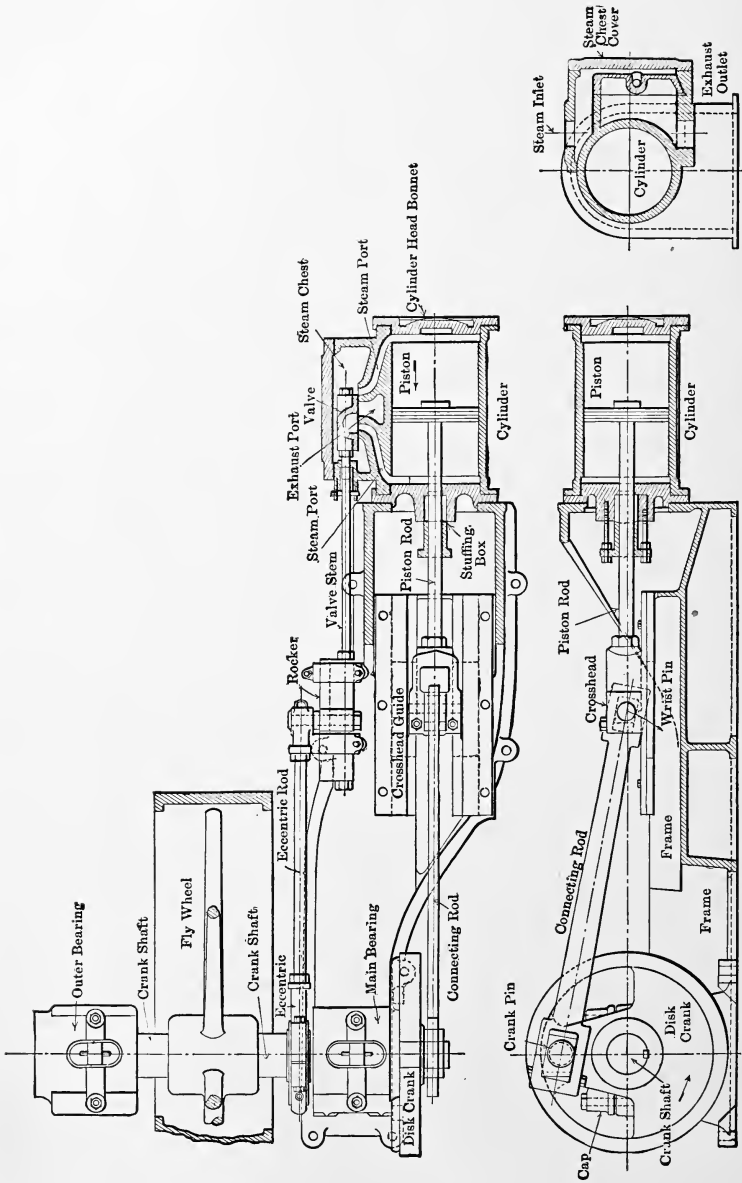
Typical Piston Engine, Single Cylinder, Throttling Governor.
